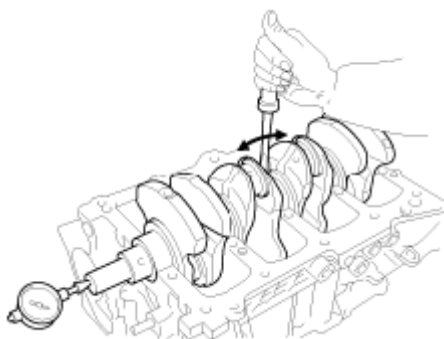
Measuring Thrust Clearance Using Dial Indicator While Prying Crankshaft Back & Forth
